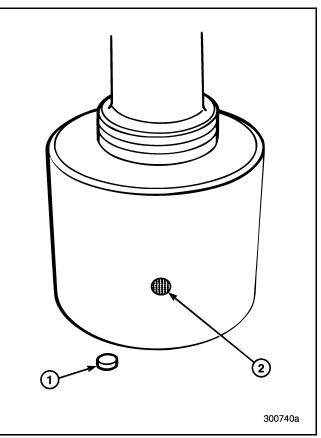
Shift Cylinder Breather Vent Shown Removed (1) and Installed (2)
